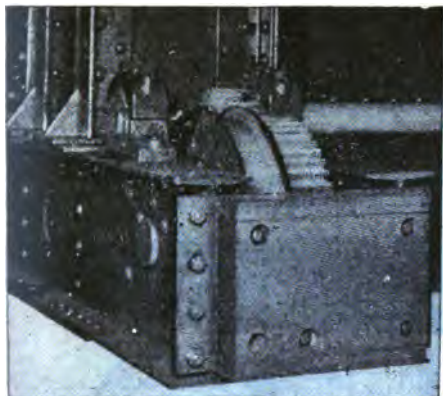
,274.—Niles crane construction; Bridge end trucks showing the two bearings for bridge drive shaft and the steel plate with bumper block at end of truck.
